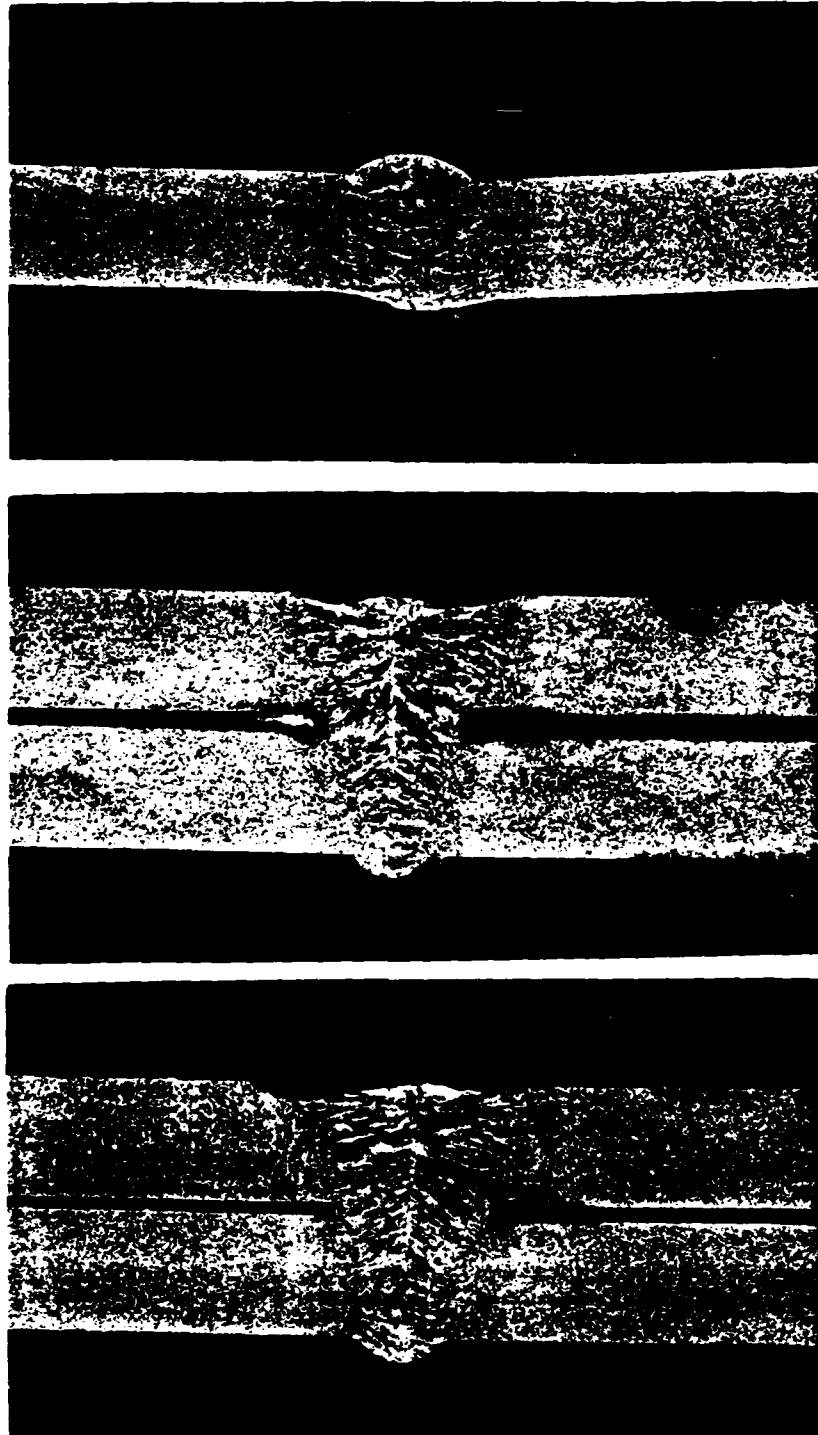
Typical cross-sections of laser welds on 1/8" steel missile container material welded at optimum parameters.
